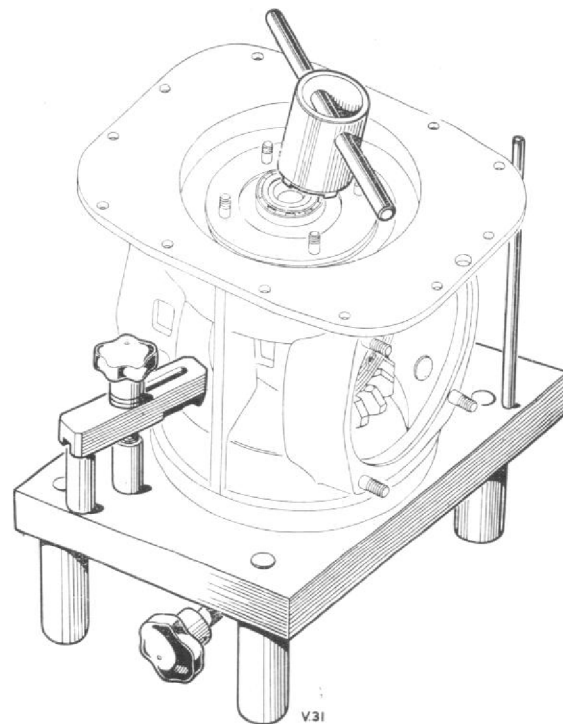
Vice block T.74912 and spanner T.72556, used to remove horizontal drive ring nut.
